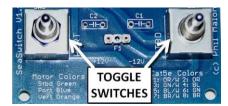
Toggle Switches Installed in the SW1 and SW2 Locations
